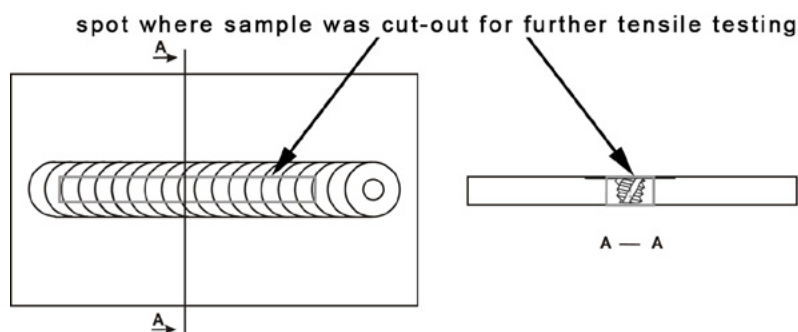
Method of sample preparation (cut-out) for strength tests: samples were cut out along the weld axis - fragment of the thermo-mechanically deformed weld material
